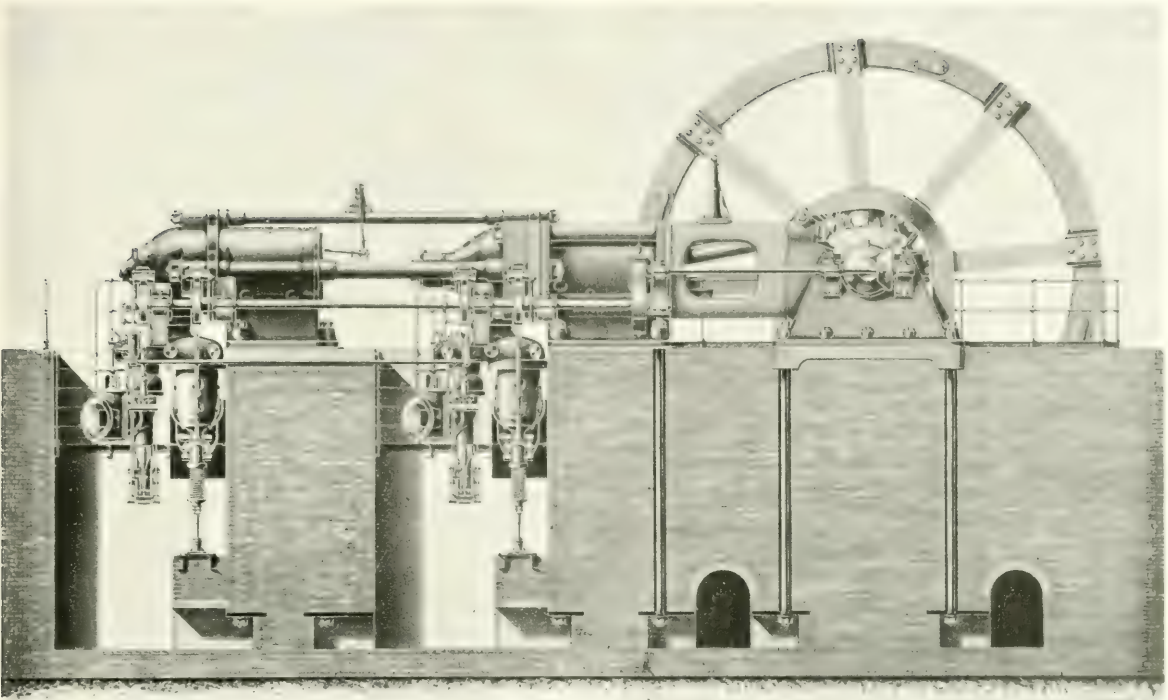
FOUR-CYCLE ACTION TWO-CYLINDER TANDEM SINGLE-ACTING FURNACE-GAS ENGINE.
